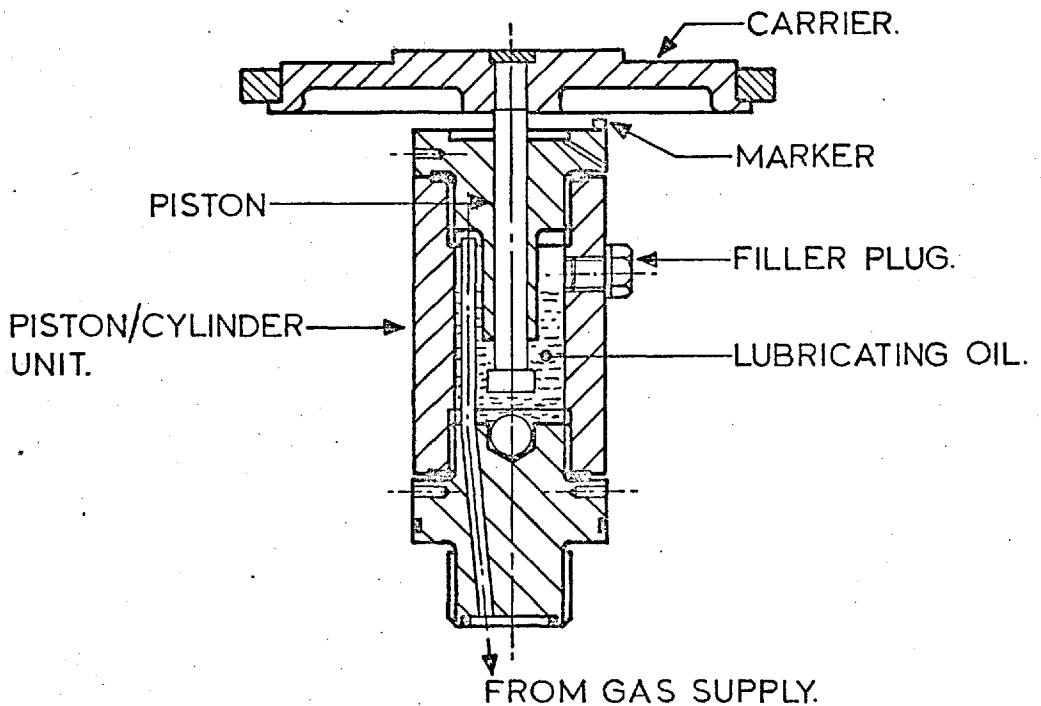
GAS PISTON GAUGE (BUDENBERG)
